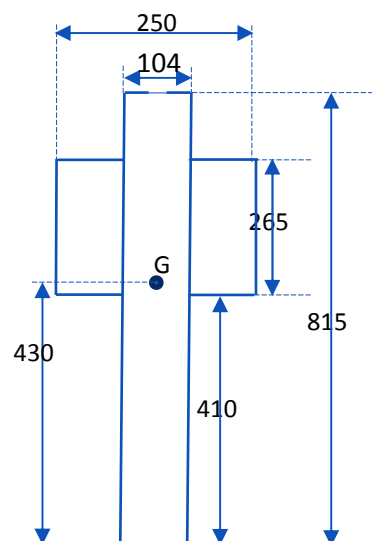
two dimension drawing of the model used for the Round Robin testing in MARINET
